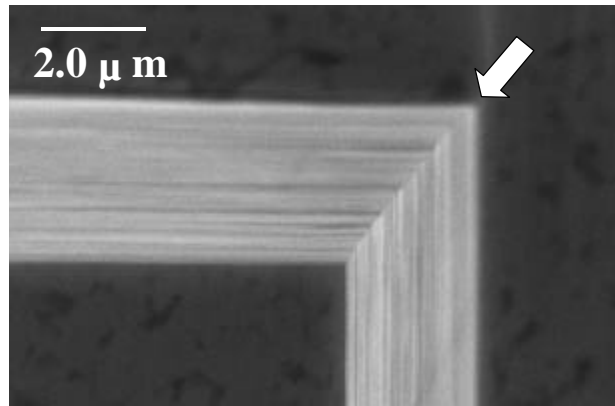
Sharp cutting edge on tungsten carbide, four-side micro-end mill.
